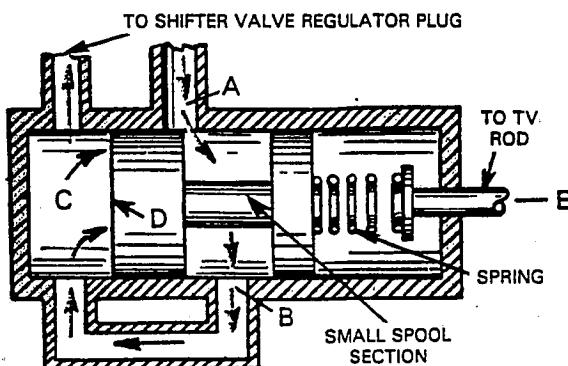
Throttle valve. Oil pressure balances spring pressure by moving spool until opening A admits proper pressure. TV rod adjusts spring pressure.
